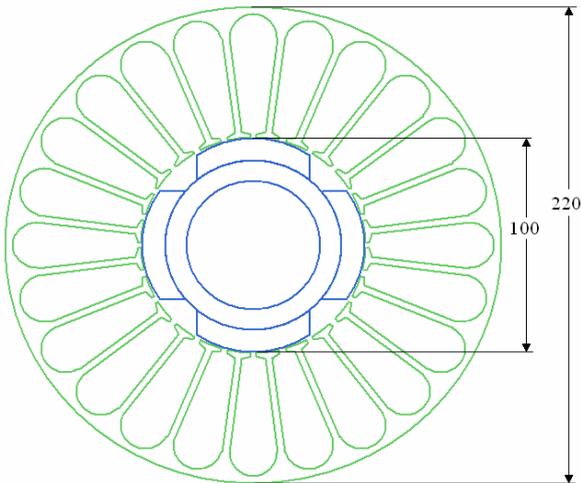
Iron sheet package view of brushless permanent magnet DC motor
